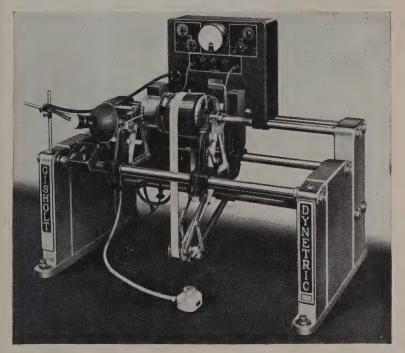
The Gisholt Dynetric Type 3S Balancing Machine.
